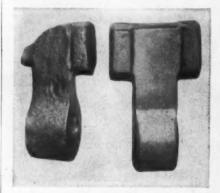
After crushing the same amount of abrasive material in a hammer mill, the badly worn steel casting (left) had a weight loss of 37 per cent while the high-chromium iron casting (right) lost only 5.5 per cent.
